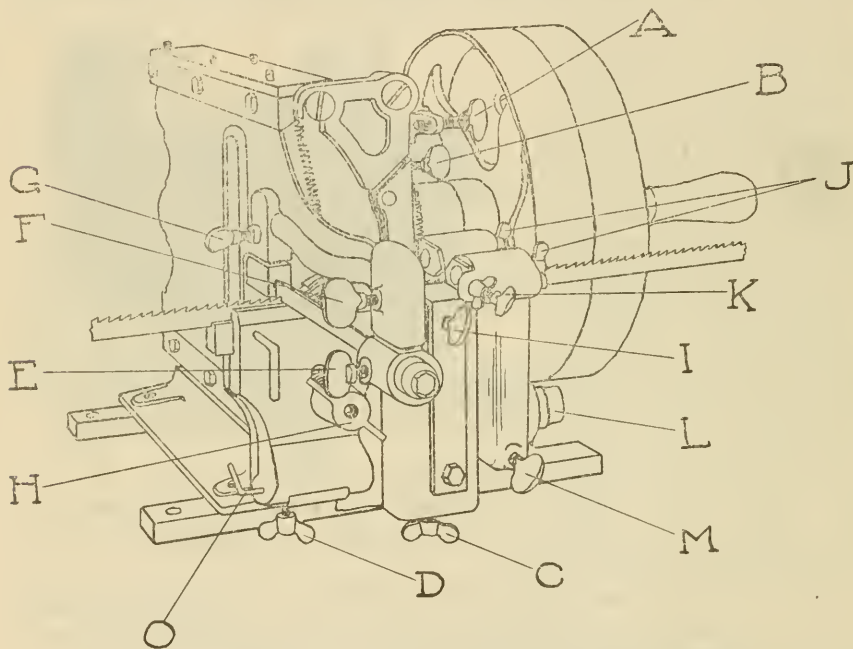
BAND SAW FILING AND SETTING MACHINE
